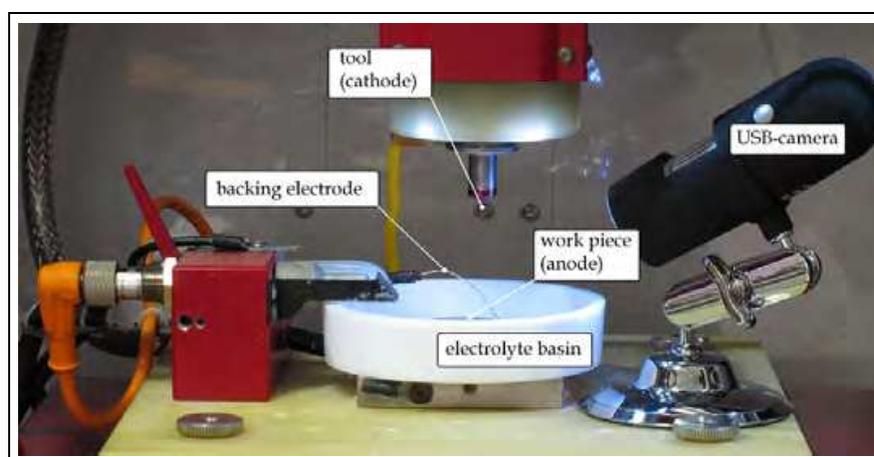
View inside the electrochemical machine with all important parts for the manufacturing process labelled
